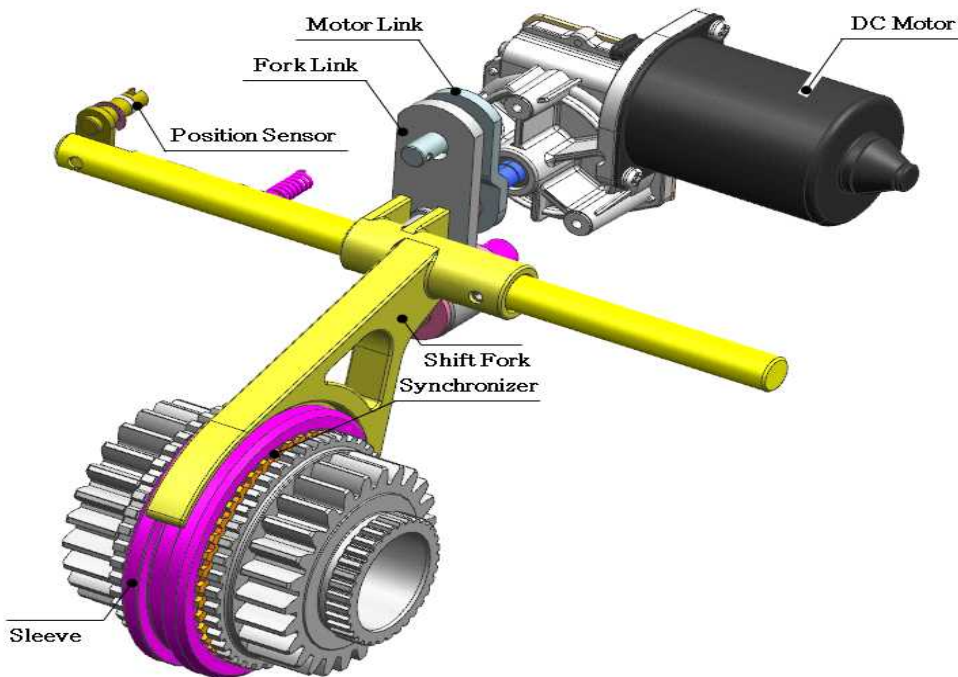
Synchronizer gear-shifting system using DC motor.
